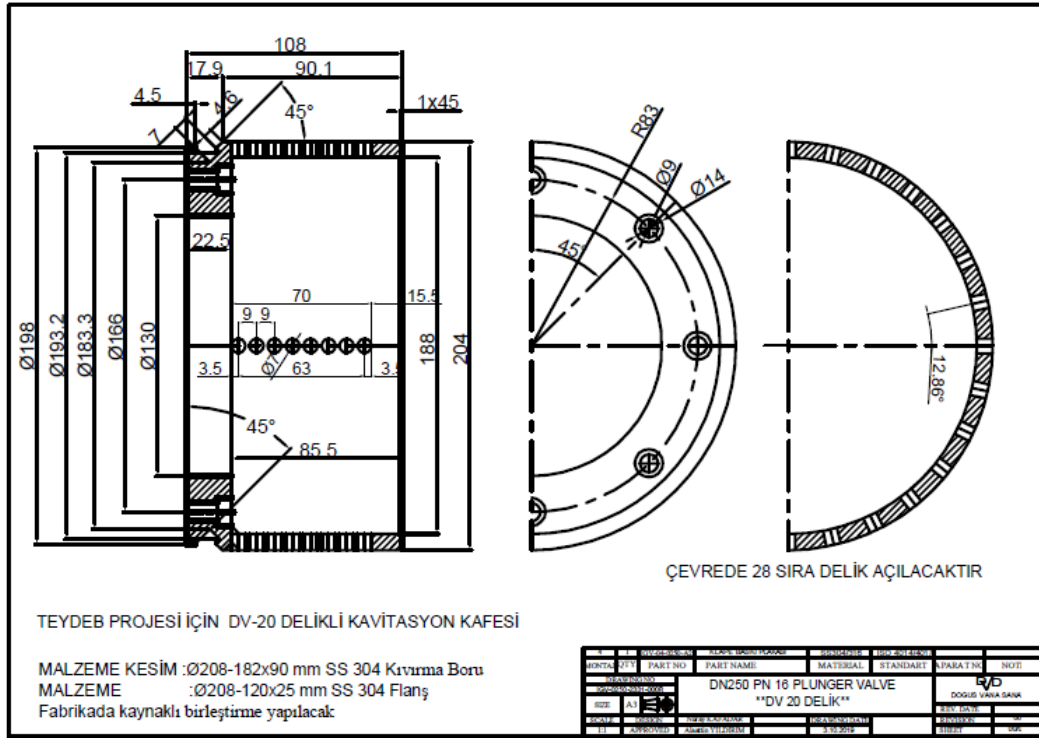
Technical Drawing DV 20 Orifice of DN 250 Plunger Valve
